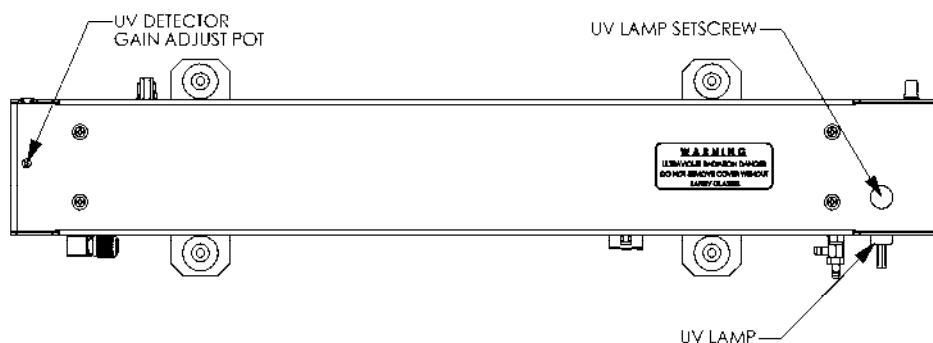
Optical Bench – Lamp Adjustment/ Installation
